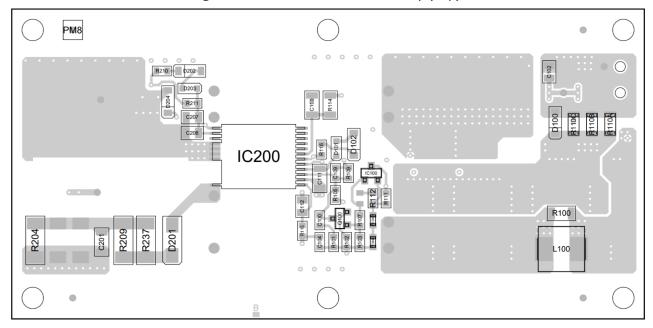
RDR-85SLR PCB Assembly (Bottom).
